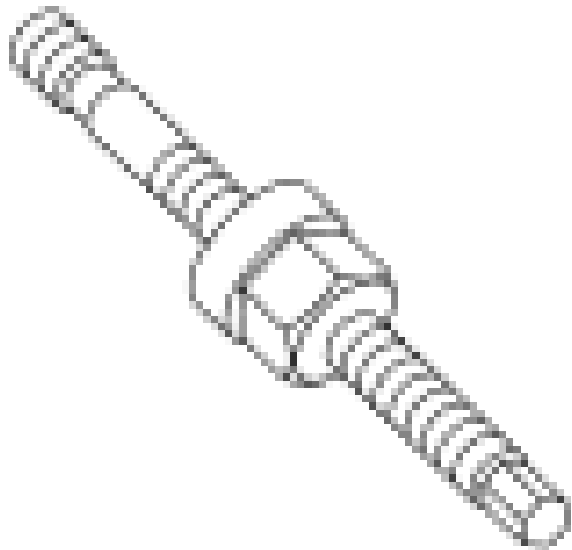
Identifying Front Cover Aligner And Crankshaft Vibration Damper Installer
